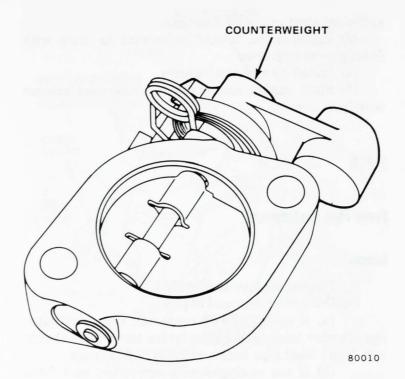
K-11 Exhaust Manifold Heat Valve in Heat ON Position—Eight-Cylinder
